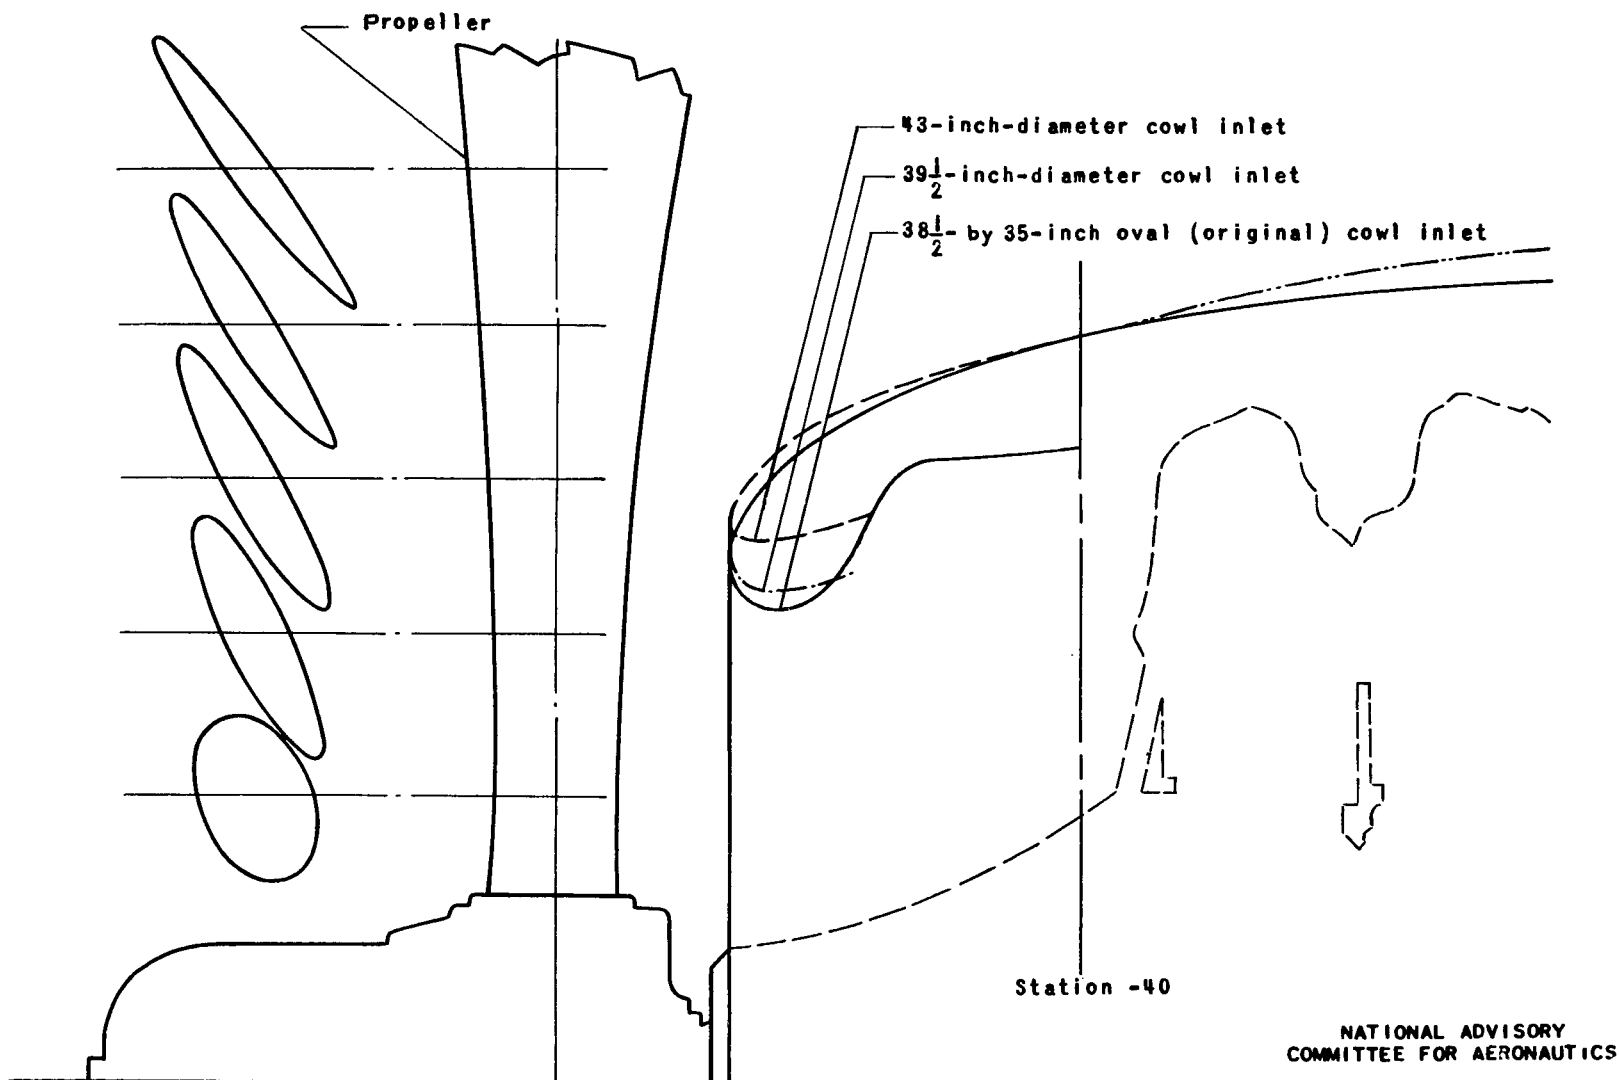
Composite drawing of upper-lip sections of cowl inlets showing propeller blade sections.
